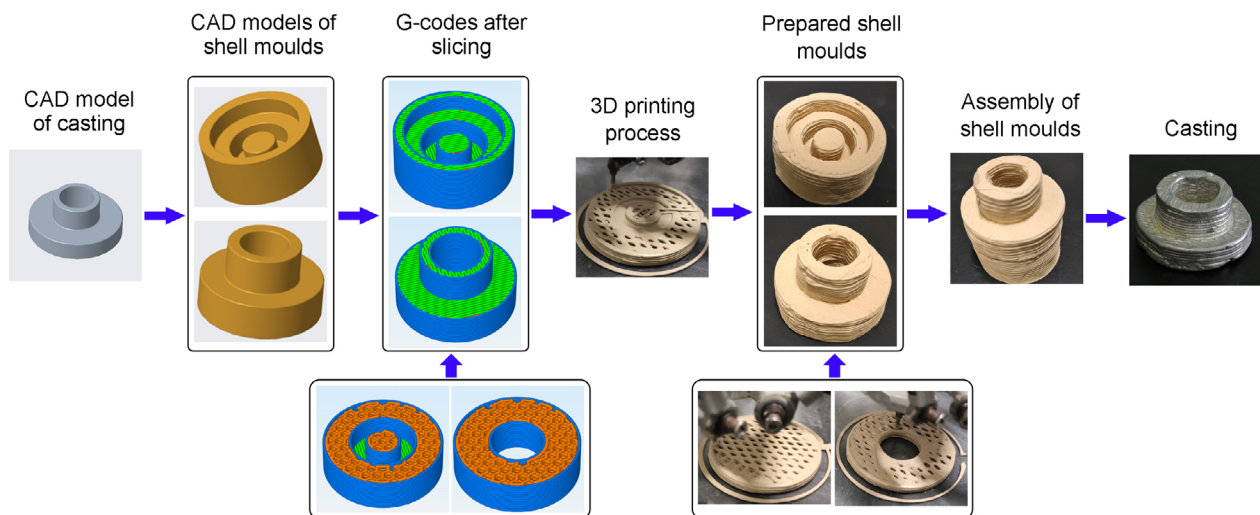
Preparation and casting process of shell moulds with honeycomb pattern
